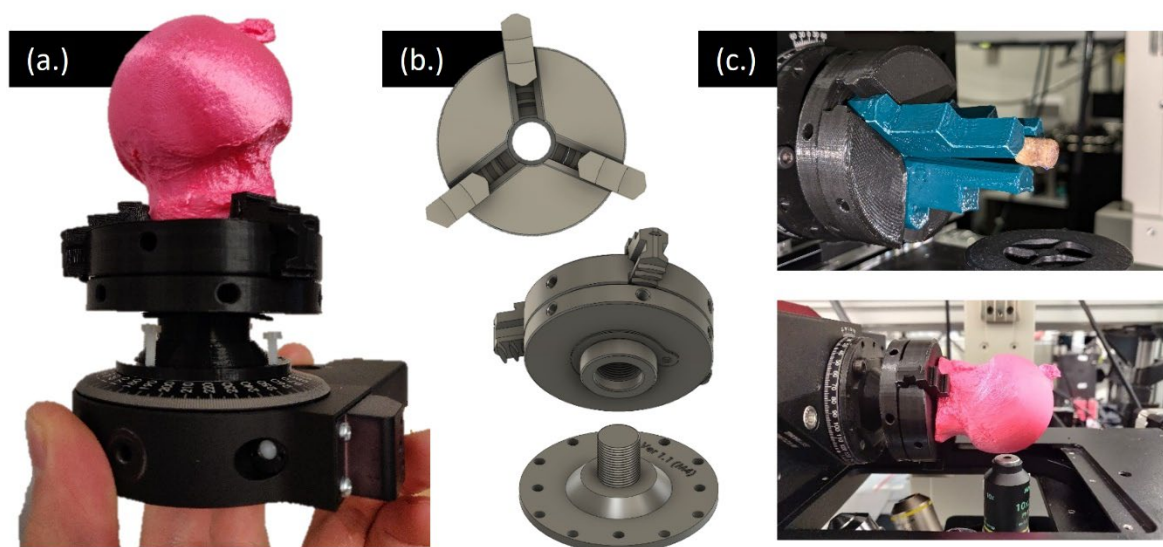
3D Printing for system prototyping and custom mounting of tissue samples (a.) Mock-up scale model of femoral head sample mounted via 3D printed chuck and screw plate onto the motorised rotation stage. (b.) 3-jaw chuck and base plate in CAD. (c.) Prototype versions of the tissue mounting rig with custom chuck jaws for holding cylindrical bone cores (~ 10 mm diameter) and the severed neck of femoral heads (~ 50 mm diameter).
